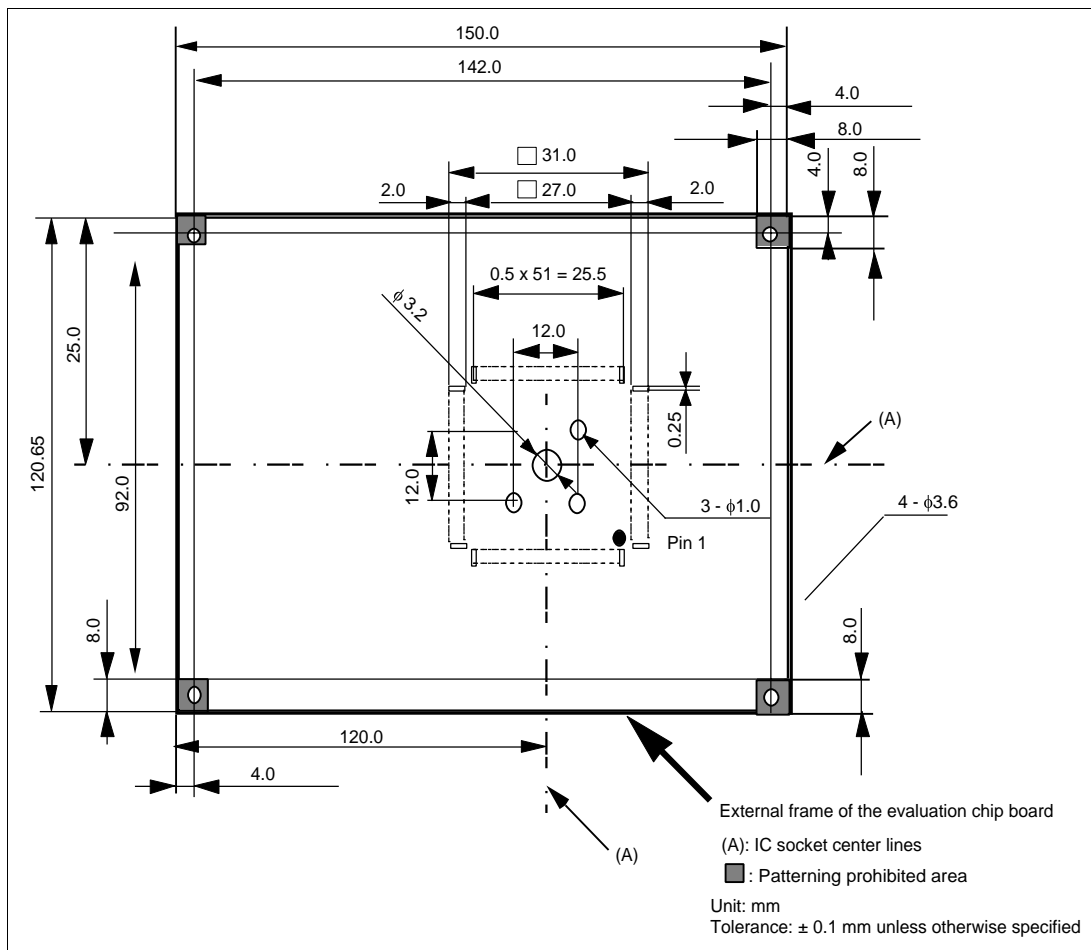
Recommended Dimensions for Mount Pad (Top View)
